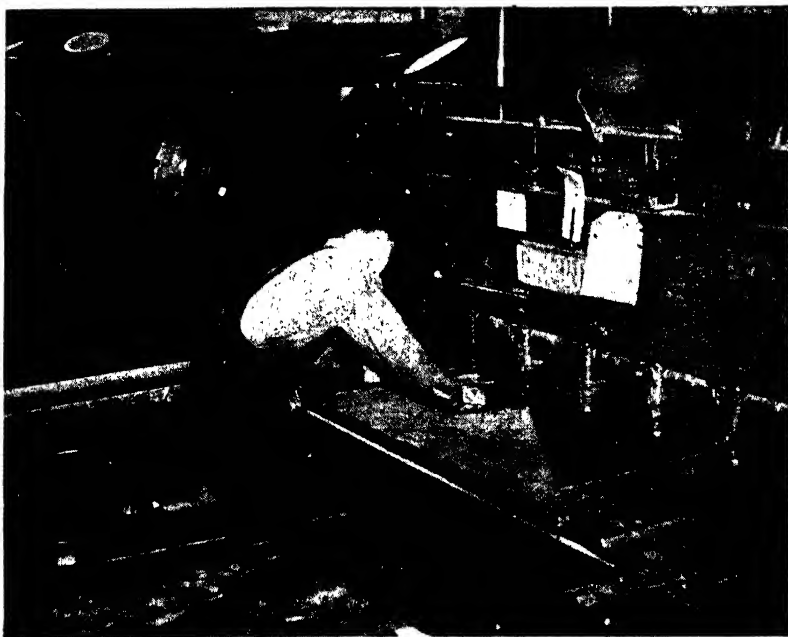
The plate shear cuts its own usable scrap into parts and also that of the flame-cutting machines which is within its cutting capacity. It is always busy and diverts much steel that might be scrapped into parts. (Courtesy of R. G. LeTourneau, Inc.)
